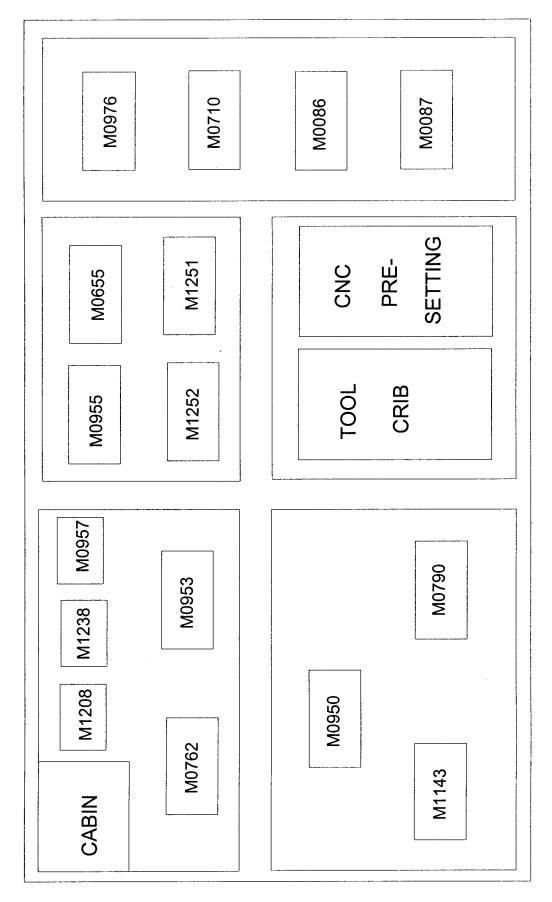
CUBICAL CELL - CNC MACHINES SECTION - LAYOUT
